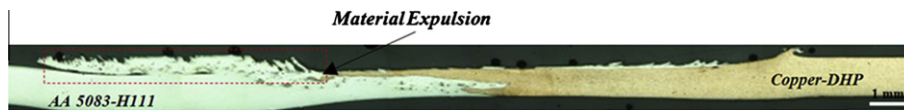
Transverse cross-section of a dissimilar weld produced with AA 5083 at the advancing side.
